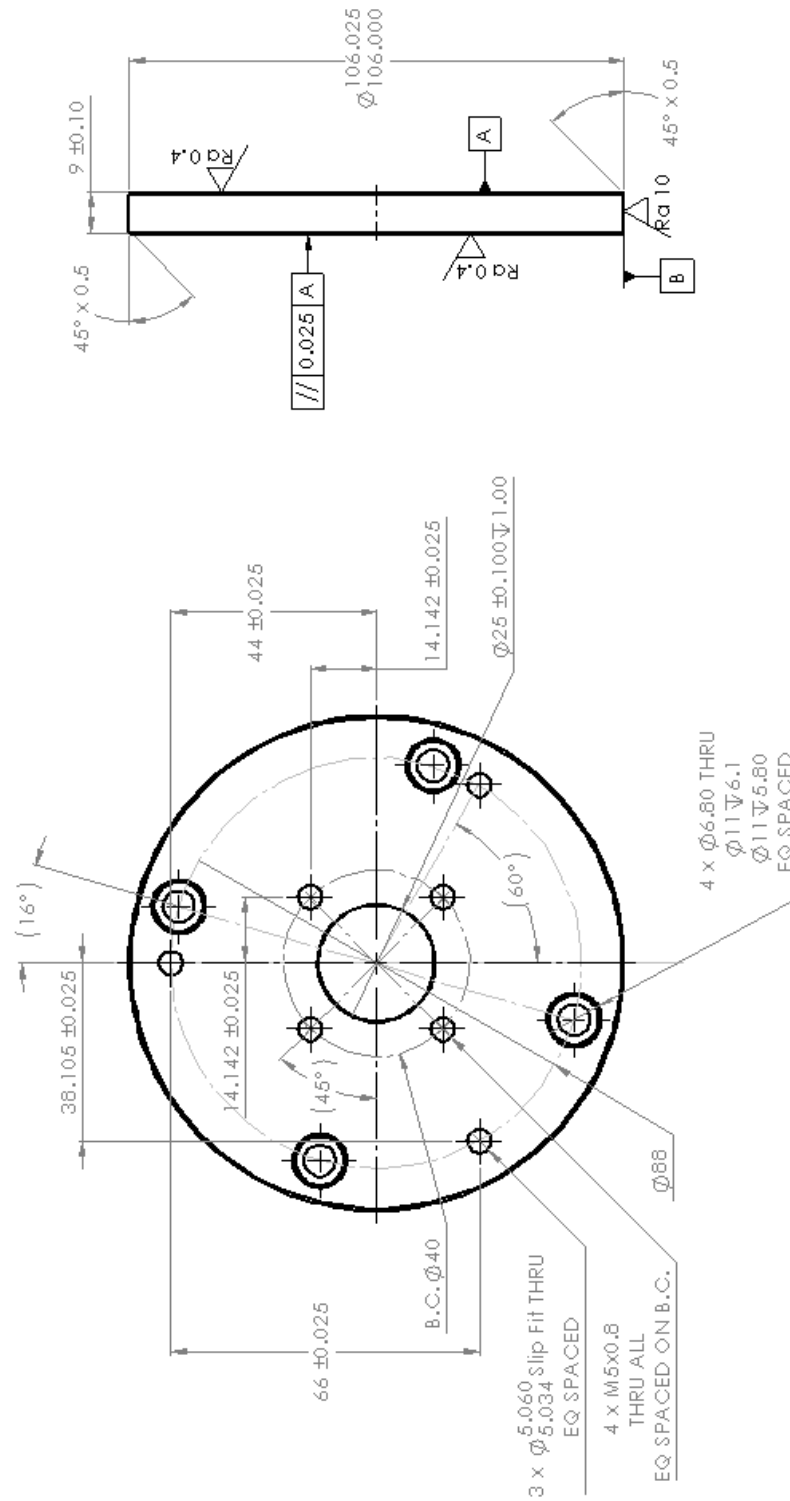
System 3-R to Force/Torque sensor connection plate. Material A17060
